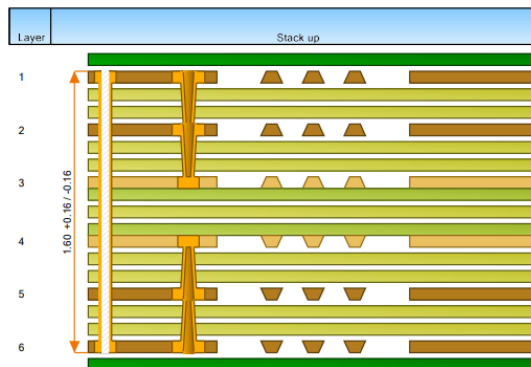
Via definitions for the test PCB. Thru hole plated via and stacked microvias used in the design.
